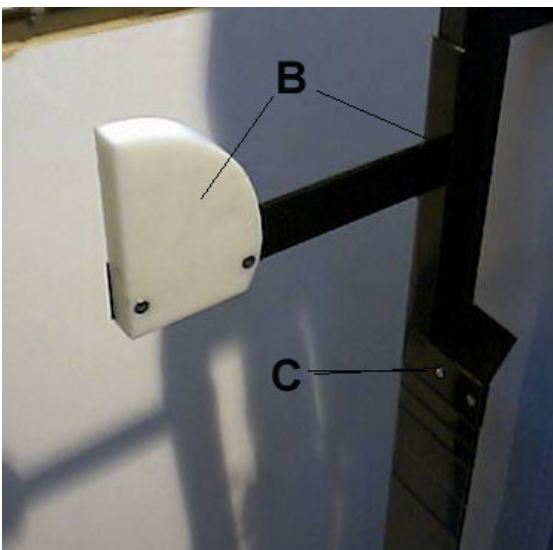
CAM "T" BRACKET & ROLLER GUIDE PLATE RAMP
